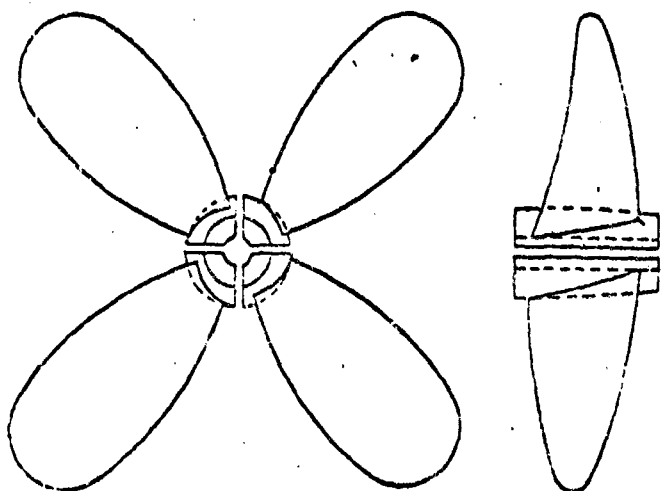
Mold and pouring arrangement for individual blades of assembled propellers:
